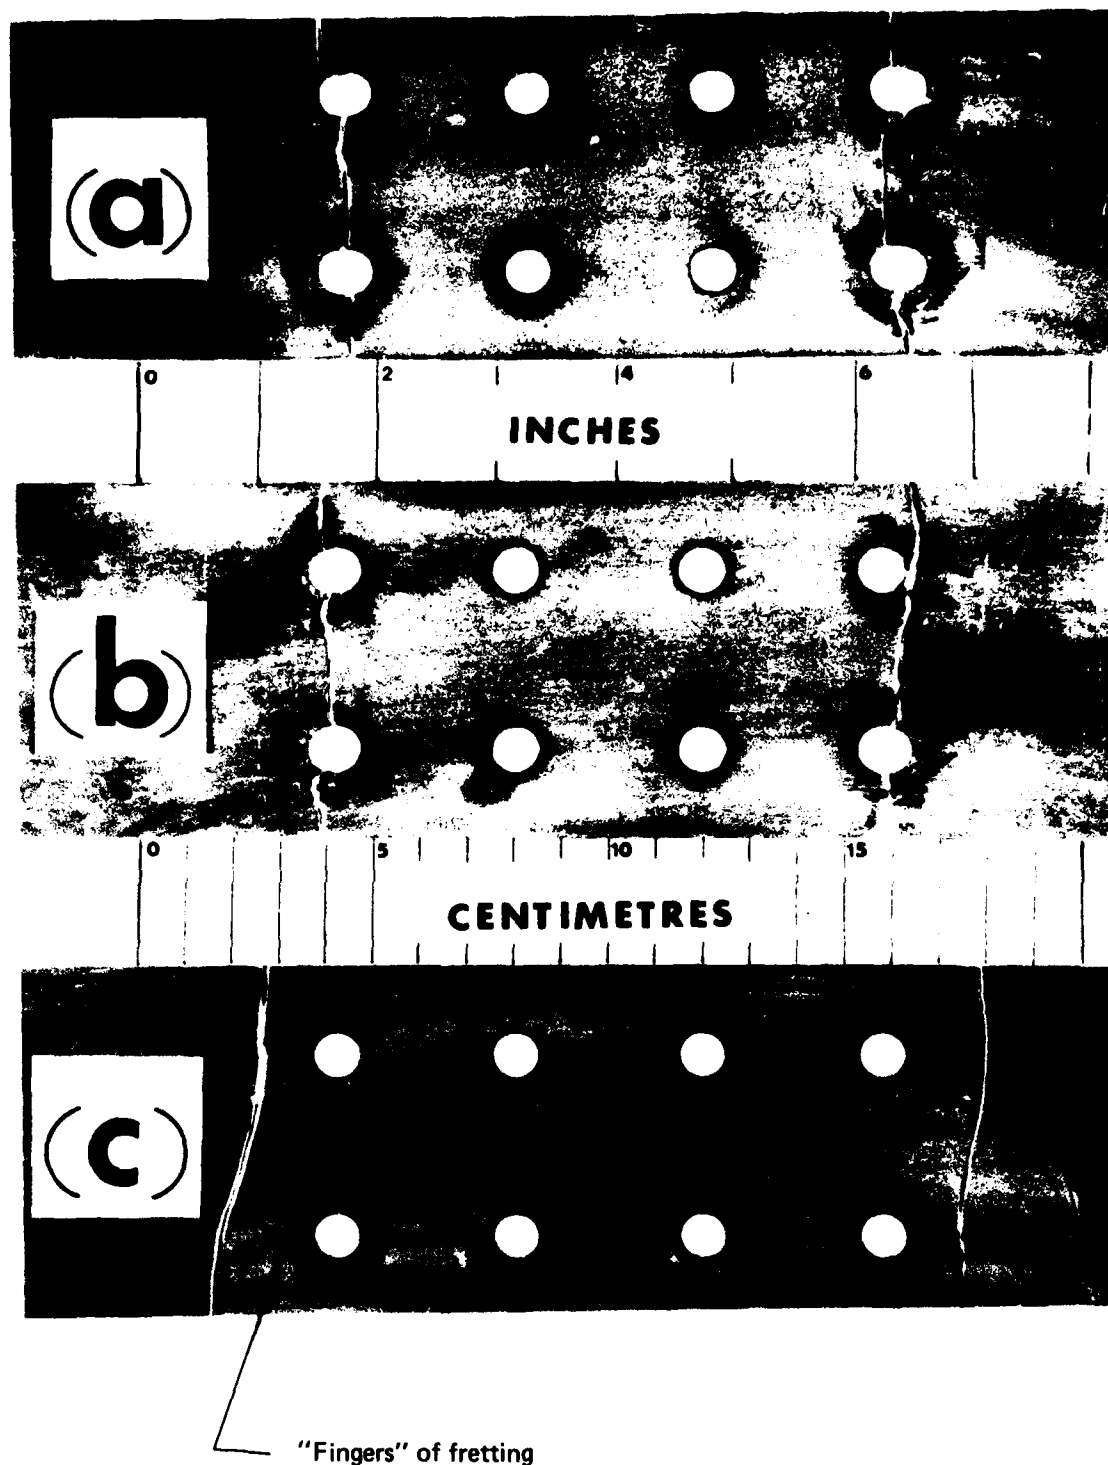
3-PIECE TIGHT DRY SPECIMEN FRACTURES
